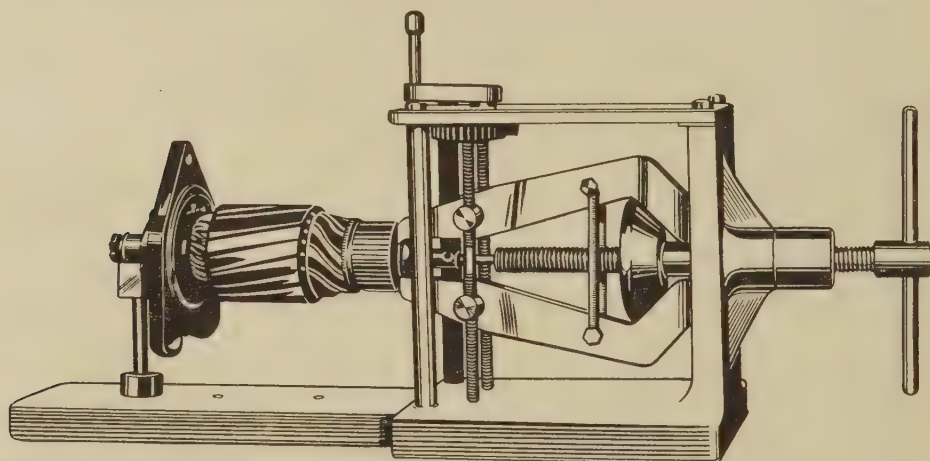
The Crypton Armature Ball-race Removing Tool.
